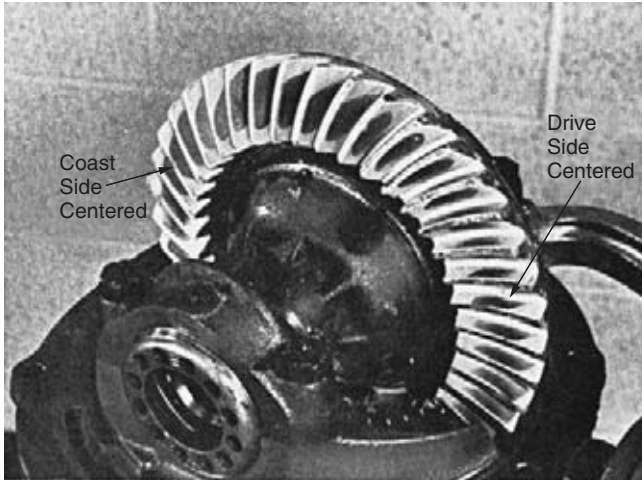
The ideal contact pattern will be about one-half the length of the gear tooth and slightly off-center toward the toe on both the drive and coast sides of the tooth. (Courtesy of Ford Motor Company)
